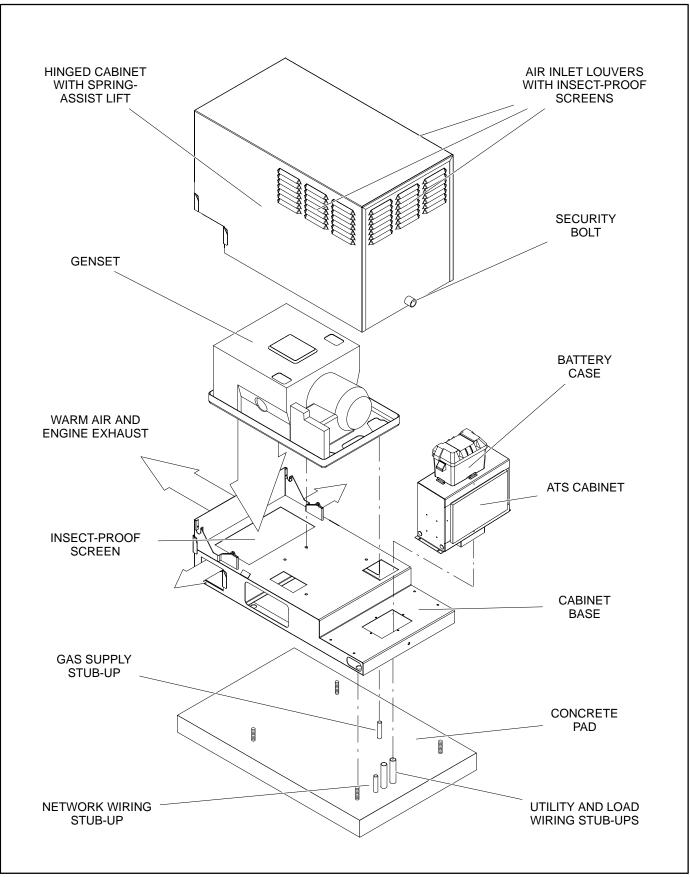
TYPICAL INSTALLATION IN AN OUTDOOR HOUSING ON A CONCRETE PAD
